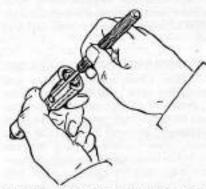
Insert special groove scraper until hooked nose of scraper enters fuel gallery. Press scraper hard against side of gallery and rotate nozzle to clear any carbon deposit from this area.
